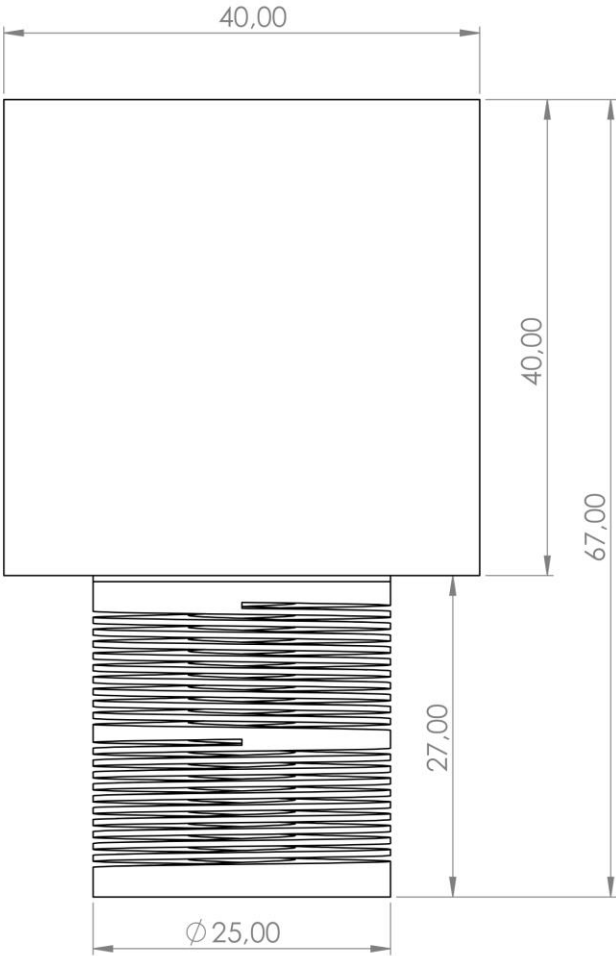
Dimensioned CAD of the Helical-B suspension model for the subsequent modal analysis
